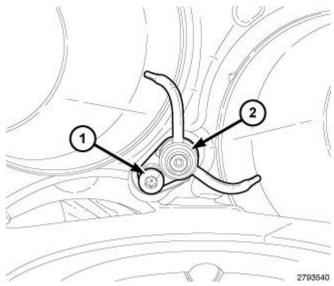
Piston Oil Cooler Jet & Bolt Courtesy of CHRYSLER GROUP, LLC
